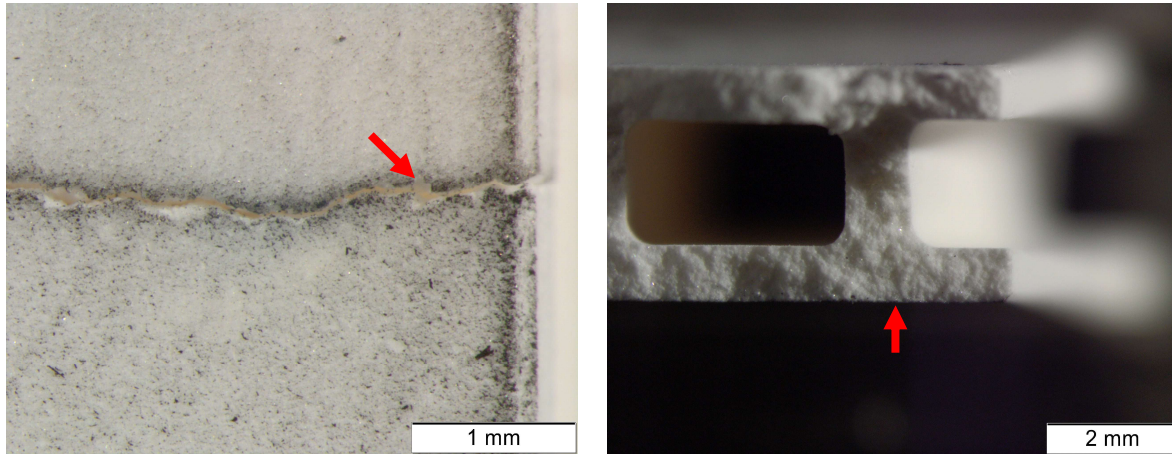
Failure origins identified from the fracture surfaces of a porous MMA tube that failed at low stress. Left - View of a pore from the tensile surface along the line of fracture, Right - Markings indicating that fracture initiated from the pore.
